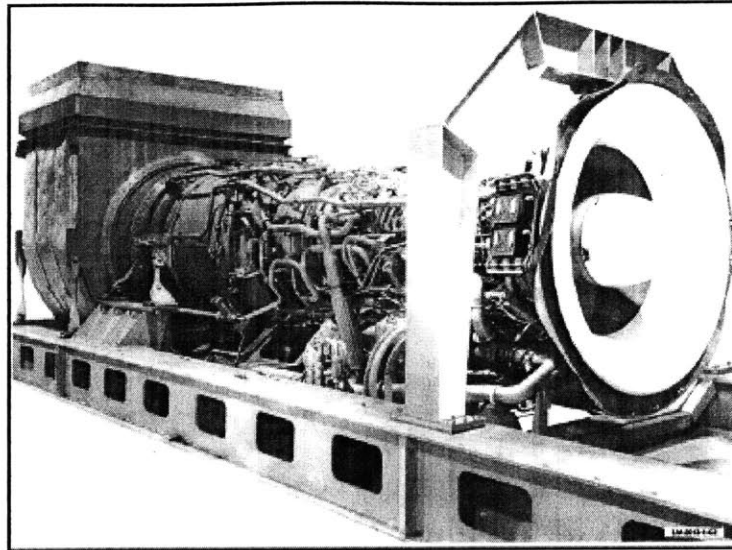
LM2500 Gas Turbine Assembly (Exterior View) from Reference 12
